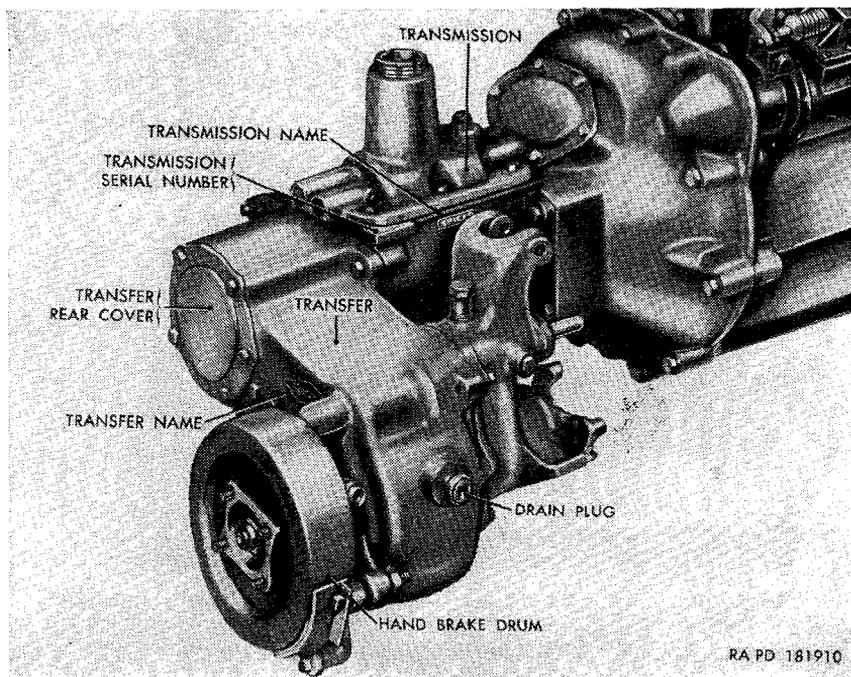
Transfer and transmission assemblies installed on engine—power plant removed from vehicle.
